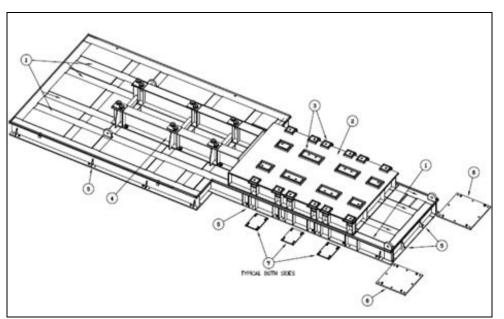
Detailed view of preferred large power high speed compressor skid construction [7]
